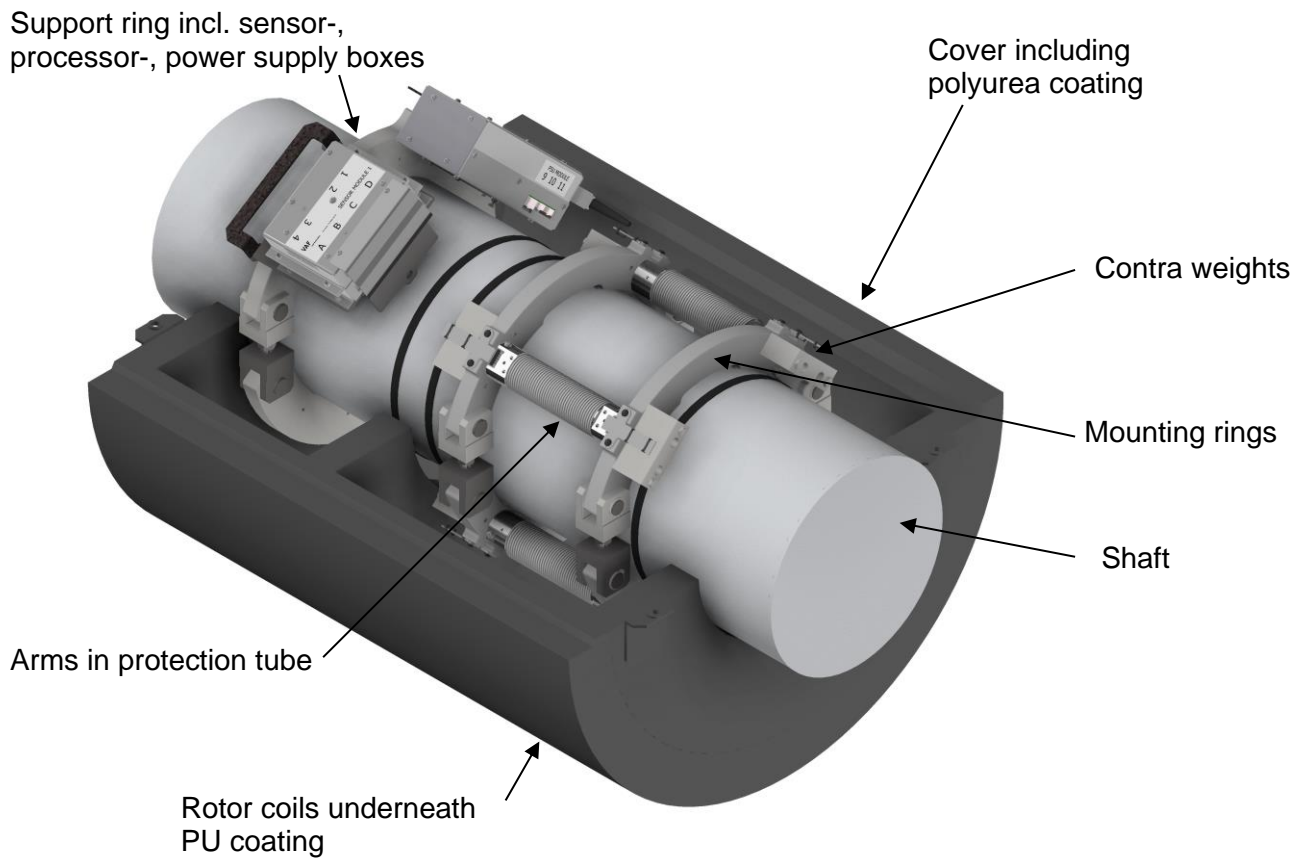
Assembly of mounting rings, contra weights, support ring, measuring arms and 1 cover part
